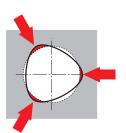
The three lobes put localized pressure at three points, reducing friction during thread forming.
